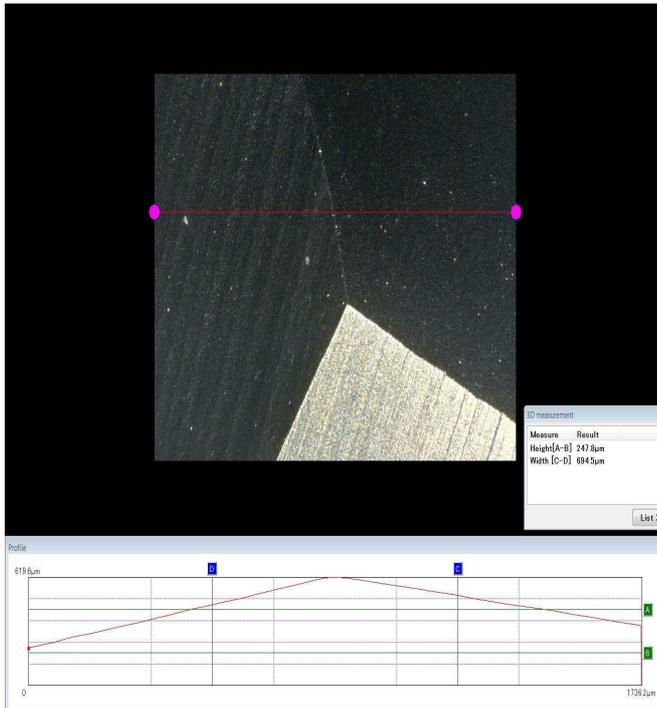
The profile measurement of the end milling cutting edge using the digital microscope
